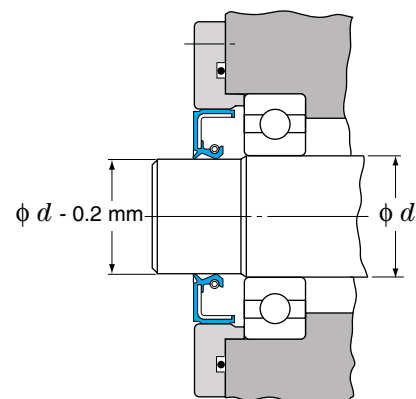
Recommended shaft profile and machine construction to avoid damaging shaft surface
